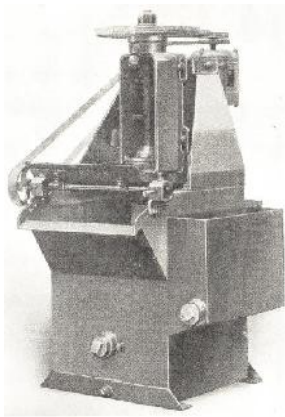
Davis "Sub-A" Machine. U.S. Pat. 1,000,000.
